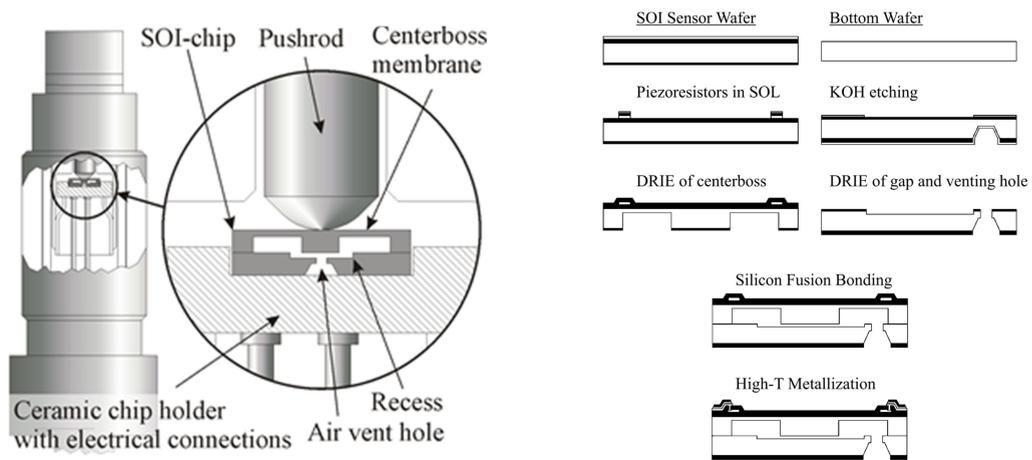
(a) Schematic view on a packaged pressure sensor (left) with enlarged cross section of the packaged SOI-chip. (b) Process flow for sensor fabrication. Piezoresistors and membrane with centerboss are fabricated in SOI wafer
